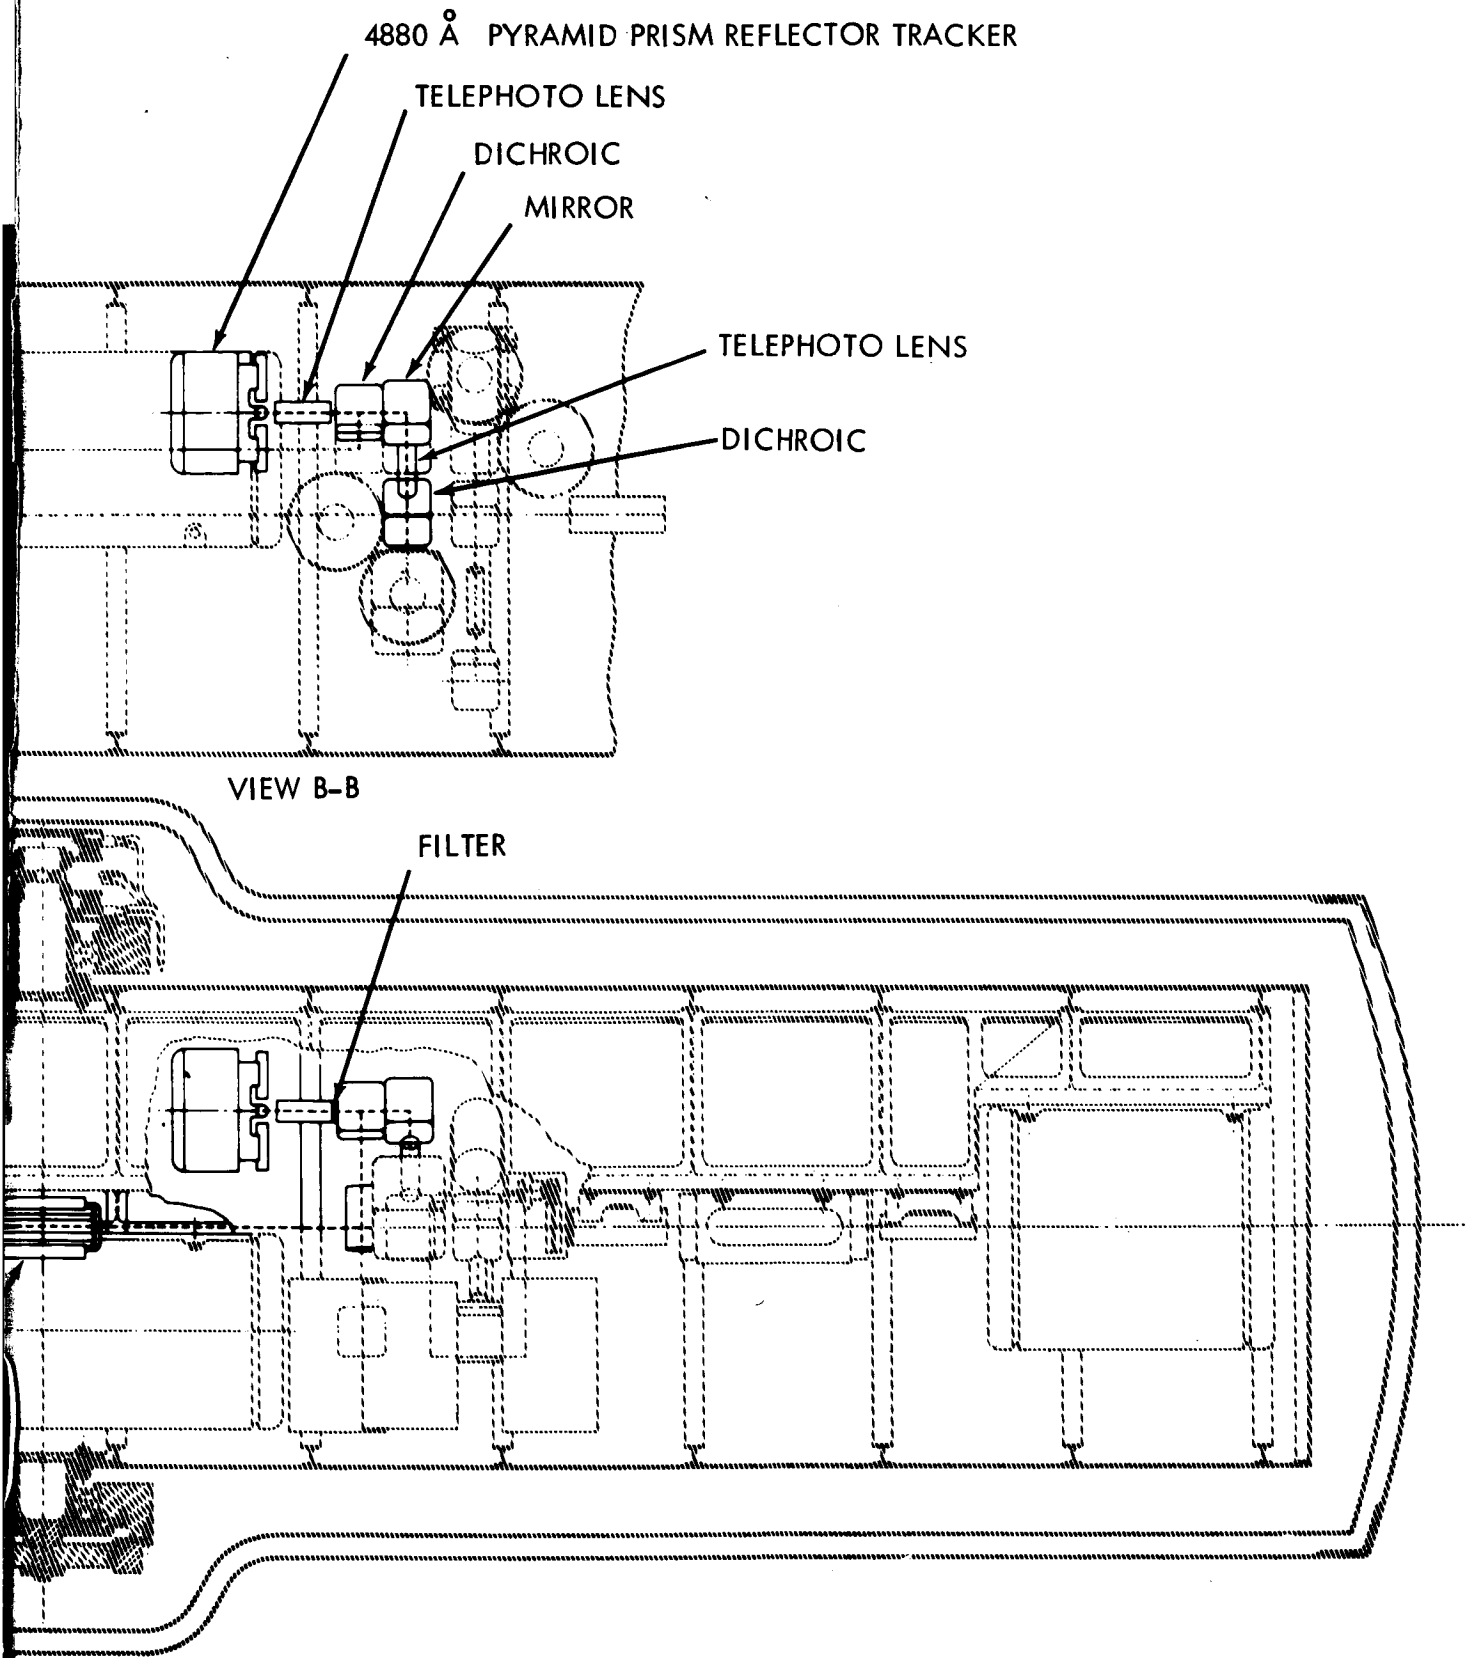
0.3 Meter Gimbaled Telescope Tracking Section
